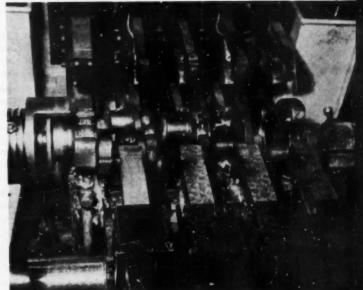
Below is crankshaft as it appears after the main bearing journals have been flame heated and are being spray quenched.
